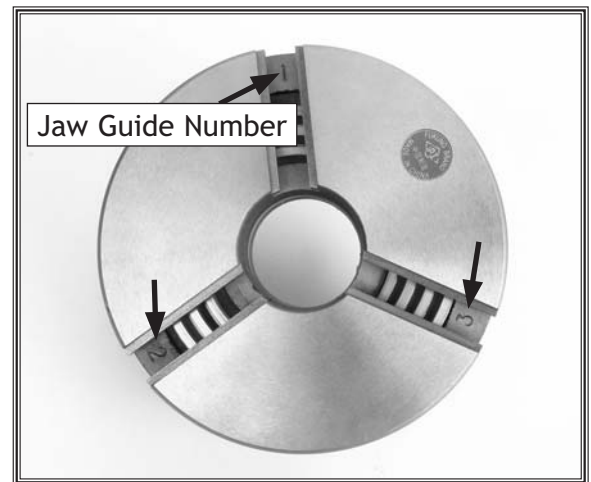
This chuck has jaw references on the inside of the jaw guide. (Chuck removed from spindle for clarity).
